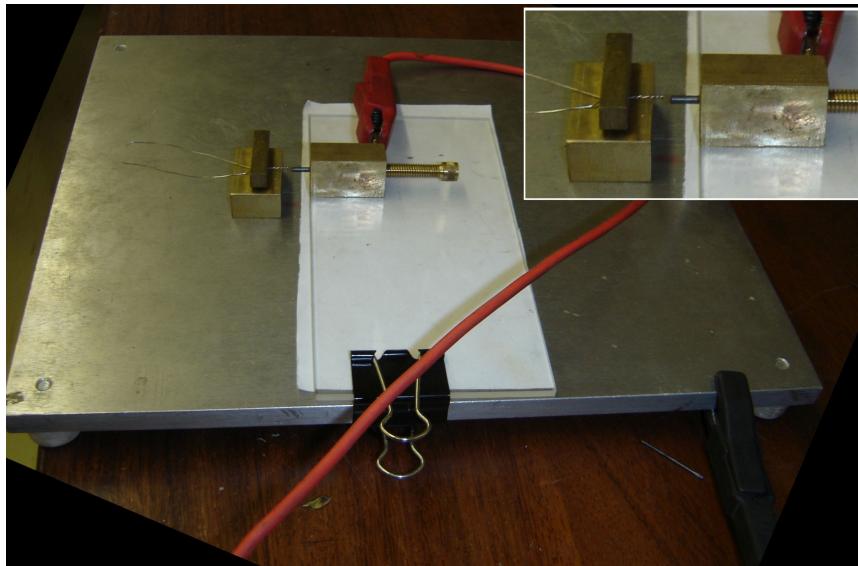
A view of the fine-wire thermocouple welder. The wire shown in the photograph is much thicker than that actually used. It is shown clamped between the clamping bar and the clamping weight. A thin sheet of acrylic serves to isolate the positive electrode from the negative base. The carbon electrode can be advanced towards the thermocouple twist using the screw. The black clamp at the bottom right-hand corner attached to the base plate and the red clamp attached to the screw housing provide a potential difference of approximately 20 V between the carbon electrode and the thermocouple.
